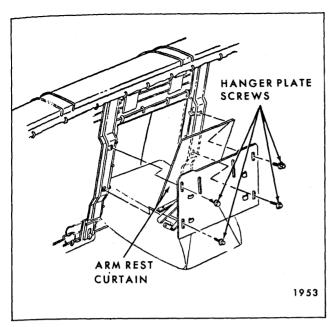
Rear Seat Back Arm Rest and Hanger Plate
